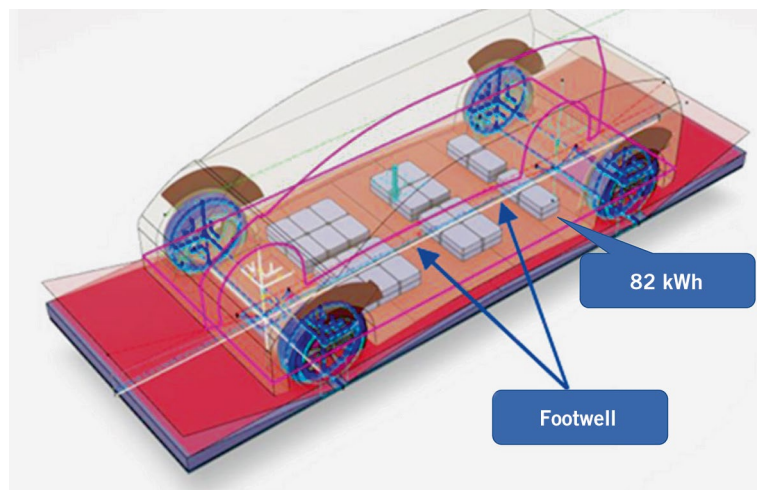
Battery packaging concept using in-wheel motors (© Protean)
